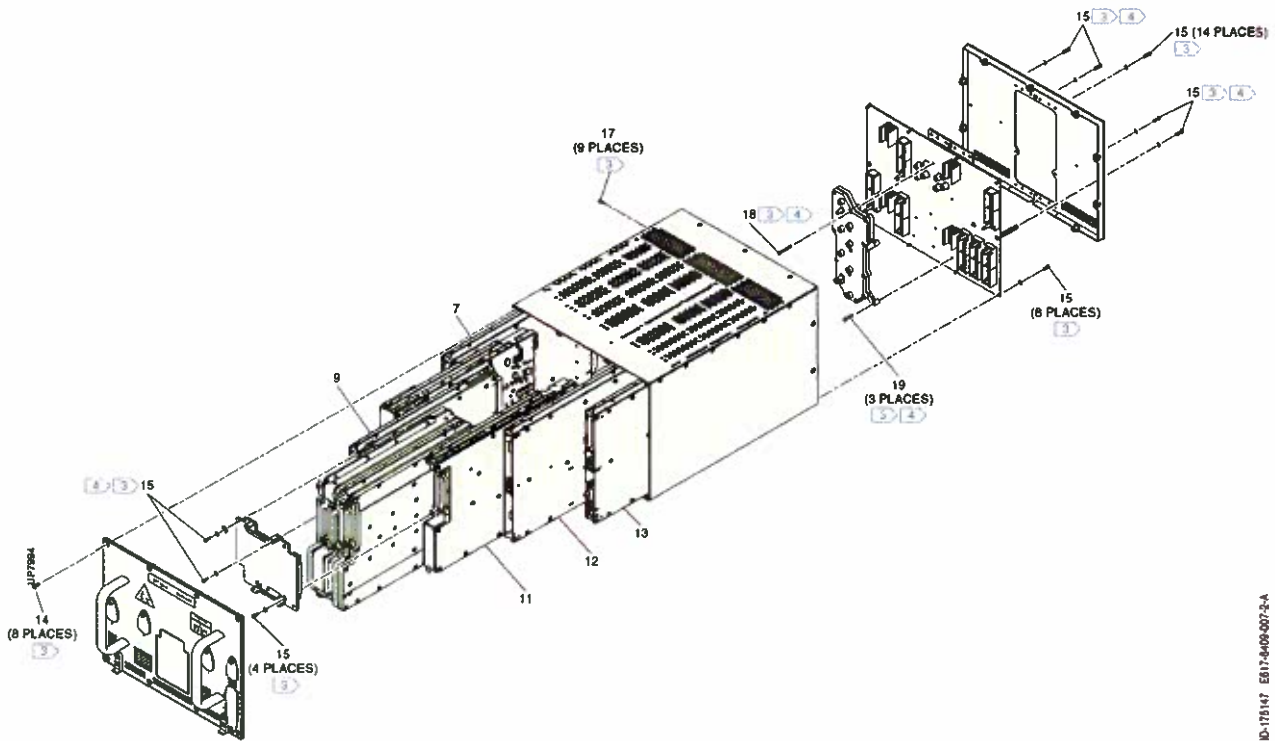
(Sheet 3 of 3) AESU Configuration Assembly Detail Drawing
